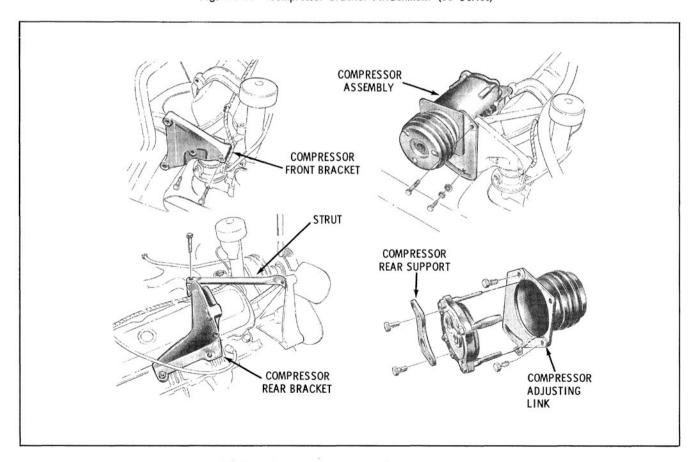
Compressor Mounting (30 - 31 & 32 Series)
